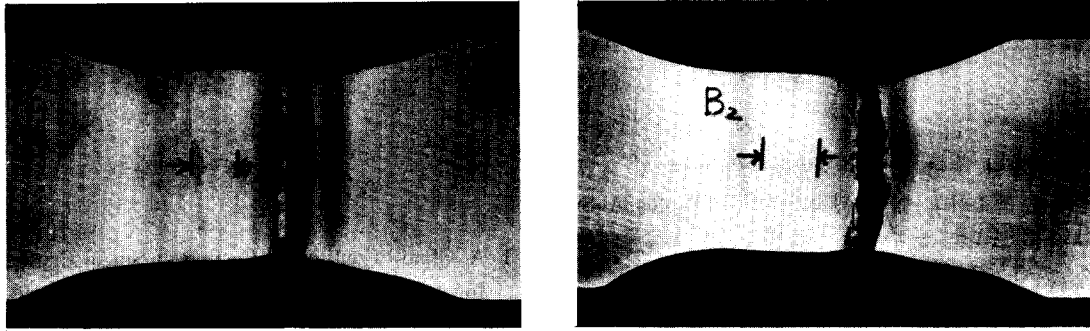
The fractured tension test specimens A1 and B2 which were fractured on the base metal
